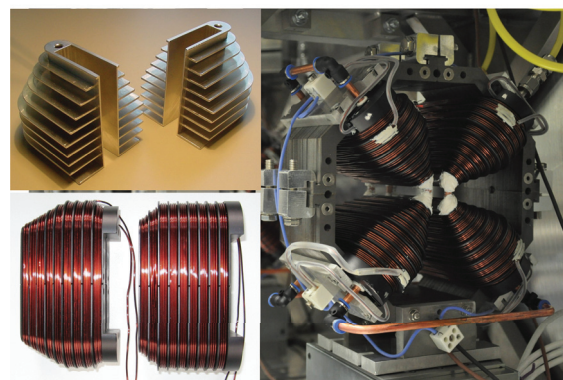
Coil former parts (top left, courtesy B. Klumbies), completed coil modules for both magnet series (bottom left, courtesy A. Rose) and a complete magnet of type *QK* readily installed in the vacuum chamber at the LWFA.
